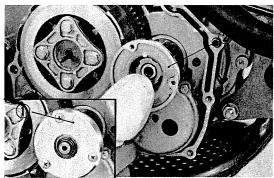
1 Oil filter rotor cover 2 Oil filter rotor
